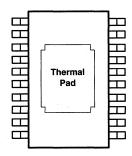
Bottom View of PWP Package, Showing the Thermal Pad
